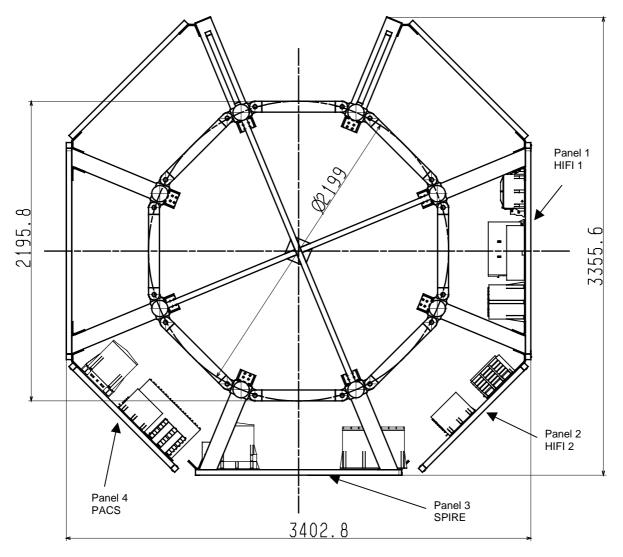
Bottom view of SVM Simulator with its basic dimensions (bottom plate not shown)
